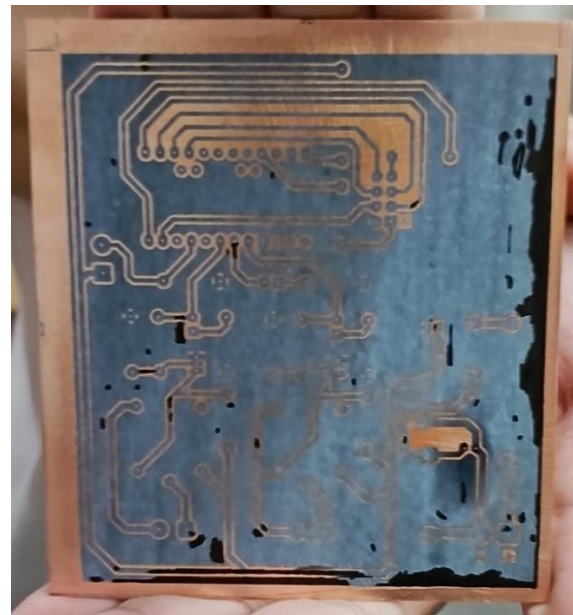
Copper-clad board after toner transfer for the Receiver PCB
